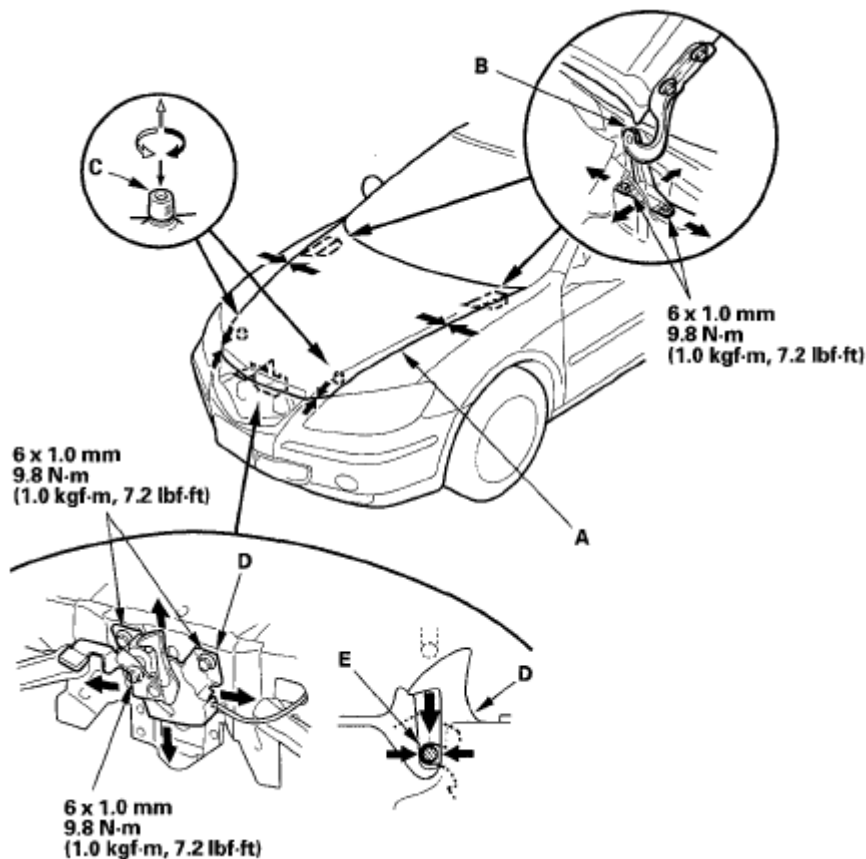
Identifying Hood Alignment, Hood Edge Cushions And Hood Hinges With Torque Specifications
